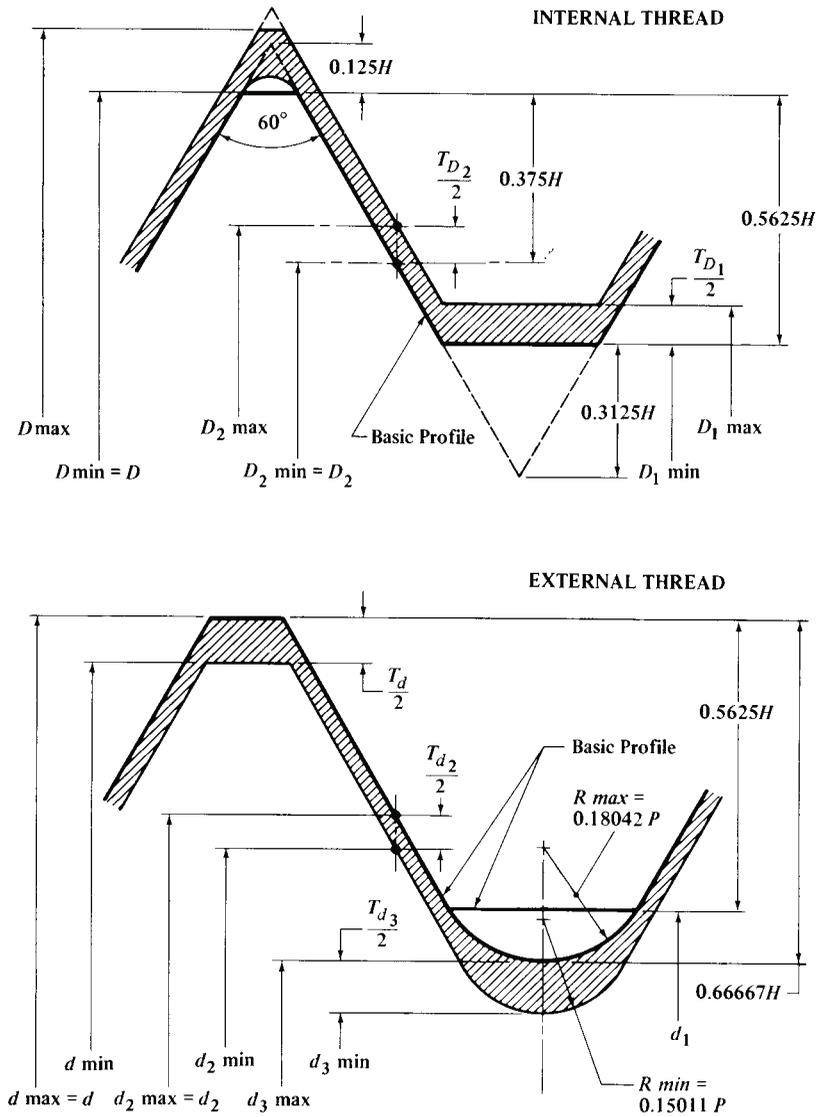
Internal MJ Thread Basic and Design Profiles (Top) and External MJ Thread Basic and Design Profiles (Bottom) Showing Tolerance Zones
